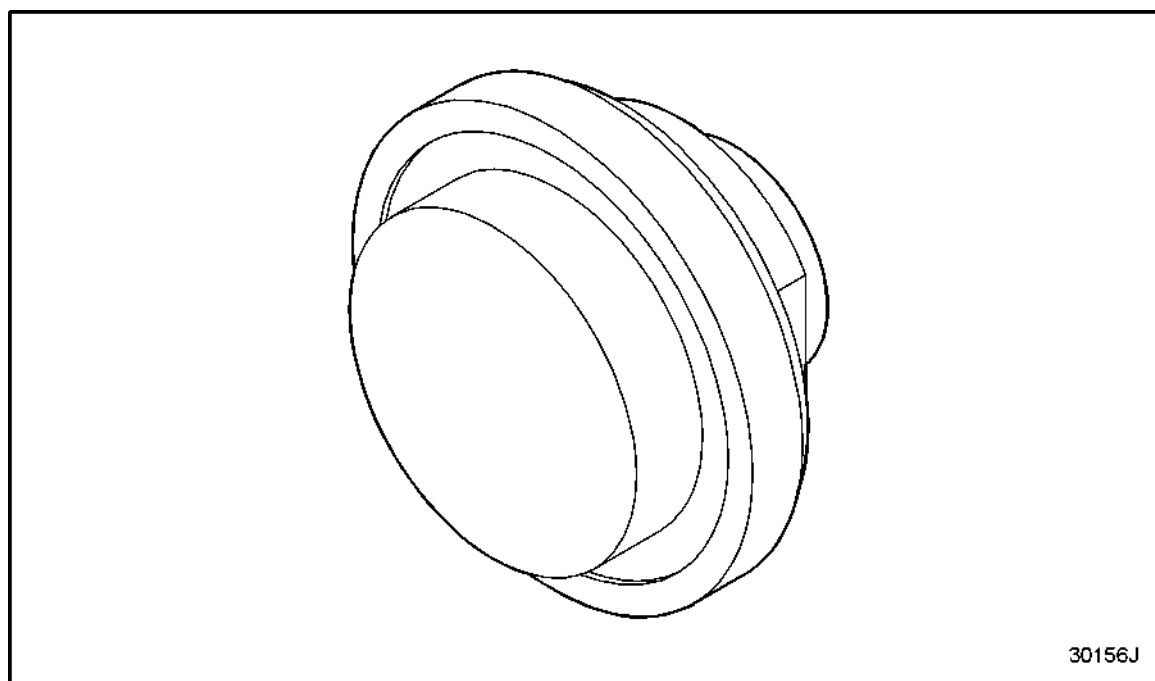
Front Seal Installer (STD Seal) ,J 9783
